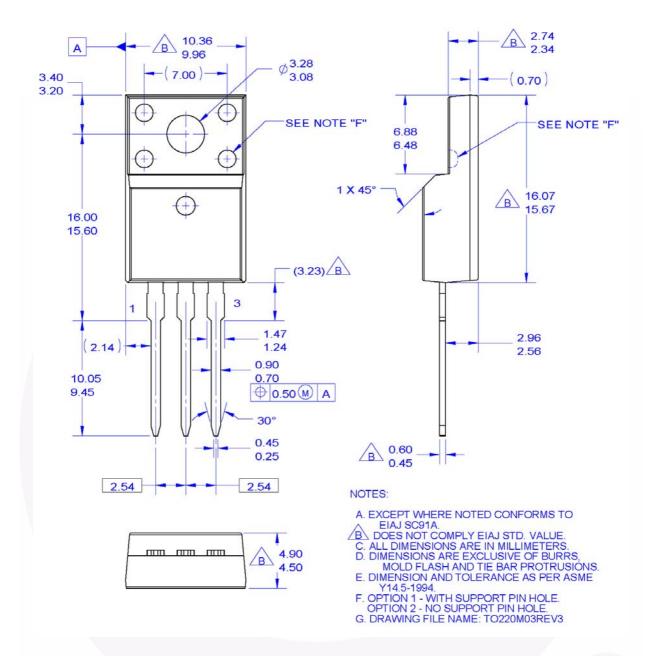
TO-220F 3L - TO220, MOLDED, 3LD, FULL PACK, EIAJ SC91, STRAIGHT LEAD
